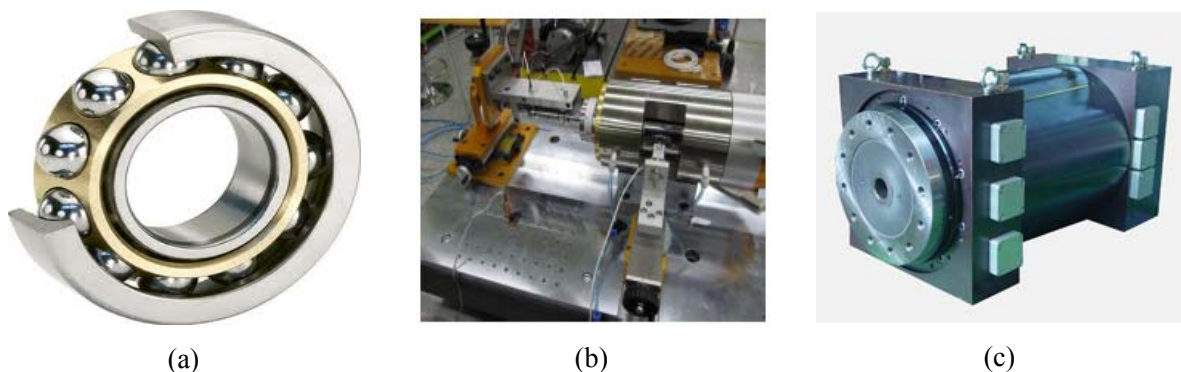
General type of the coupling system in the rotating system:(a) ball bearing (b) aerostatic bearing (c) hydrostatic bearing
